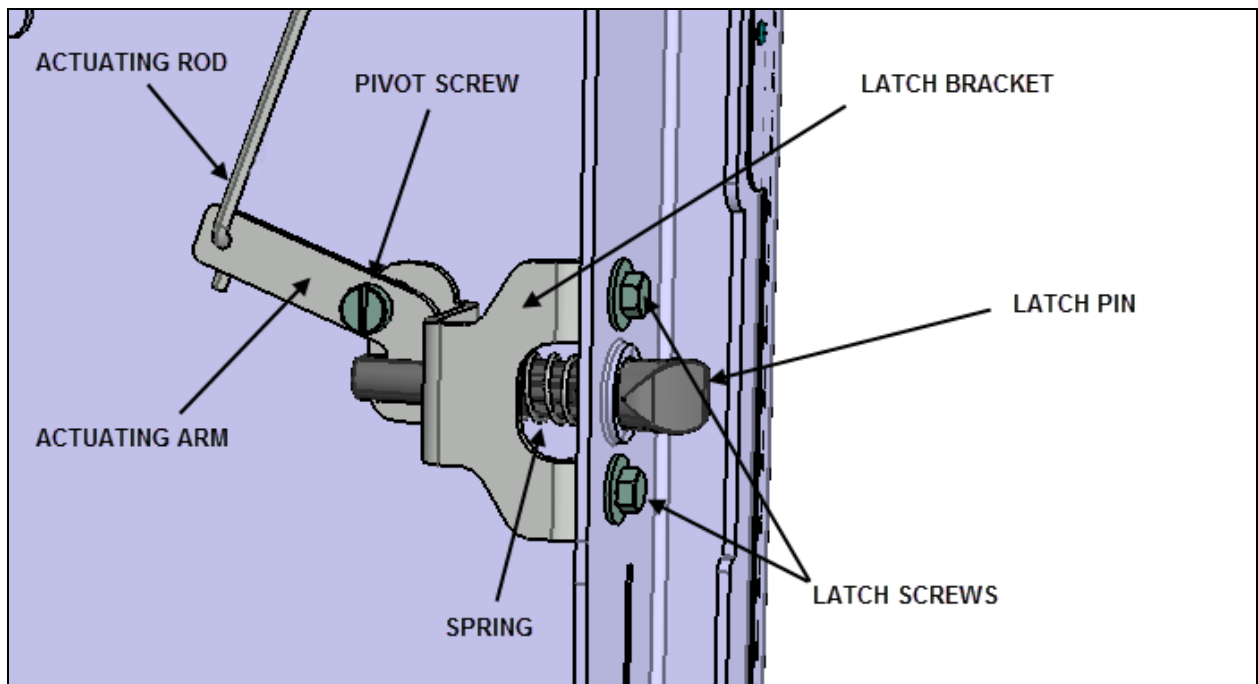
LATCH MECHANISM COPONENTS IDENTIFICATION
